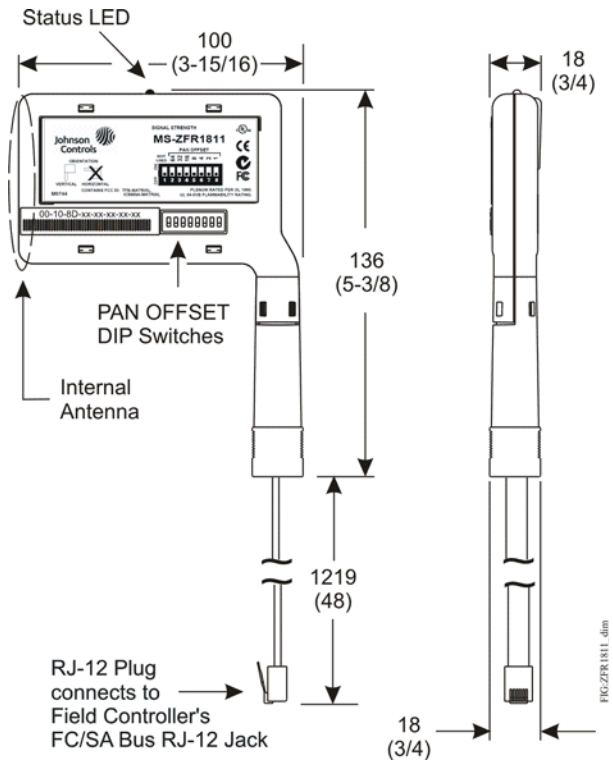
ZFR1811 Wireless Field Bus Router, Physical Features and Dimensions, mm (in.)
